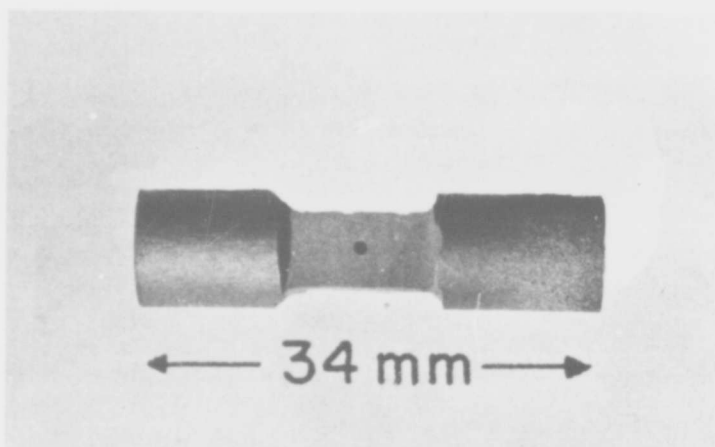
Hot-Pressed, Ground, and Drilled Pirani Melting Point Specimen.
